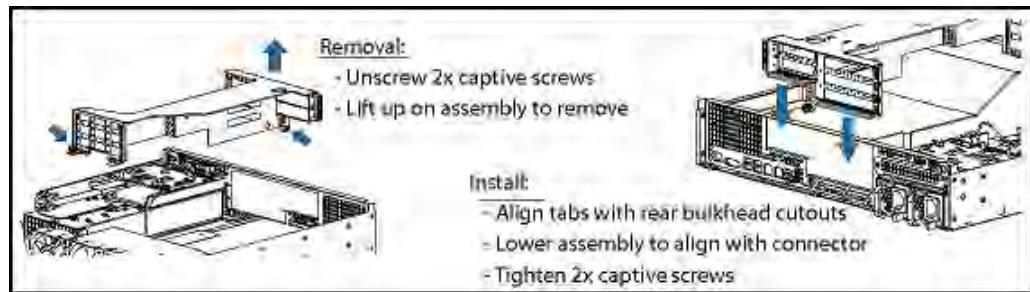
Lifting the PCI Cage Assembly Out of the Enclosure
